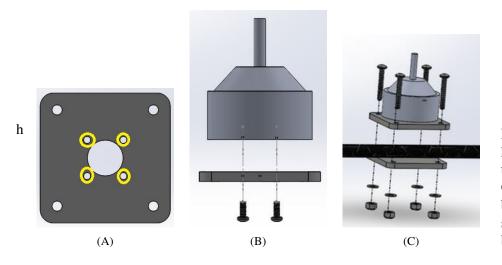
The base plate has four holes, (A), for srews that will attach the motor to its base, (B). Once they are attached the motor base can then be attached with screws to the mounts on the carbon fiber tube, (C).
